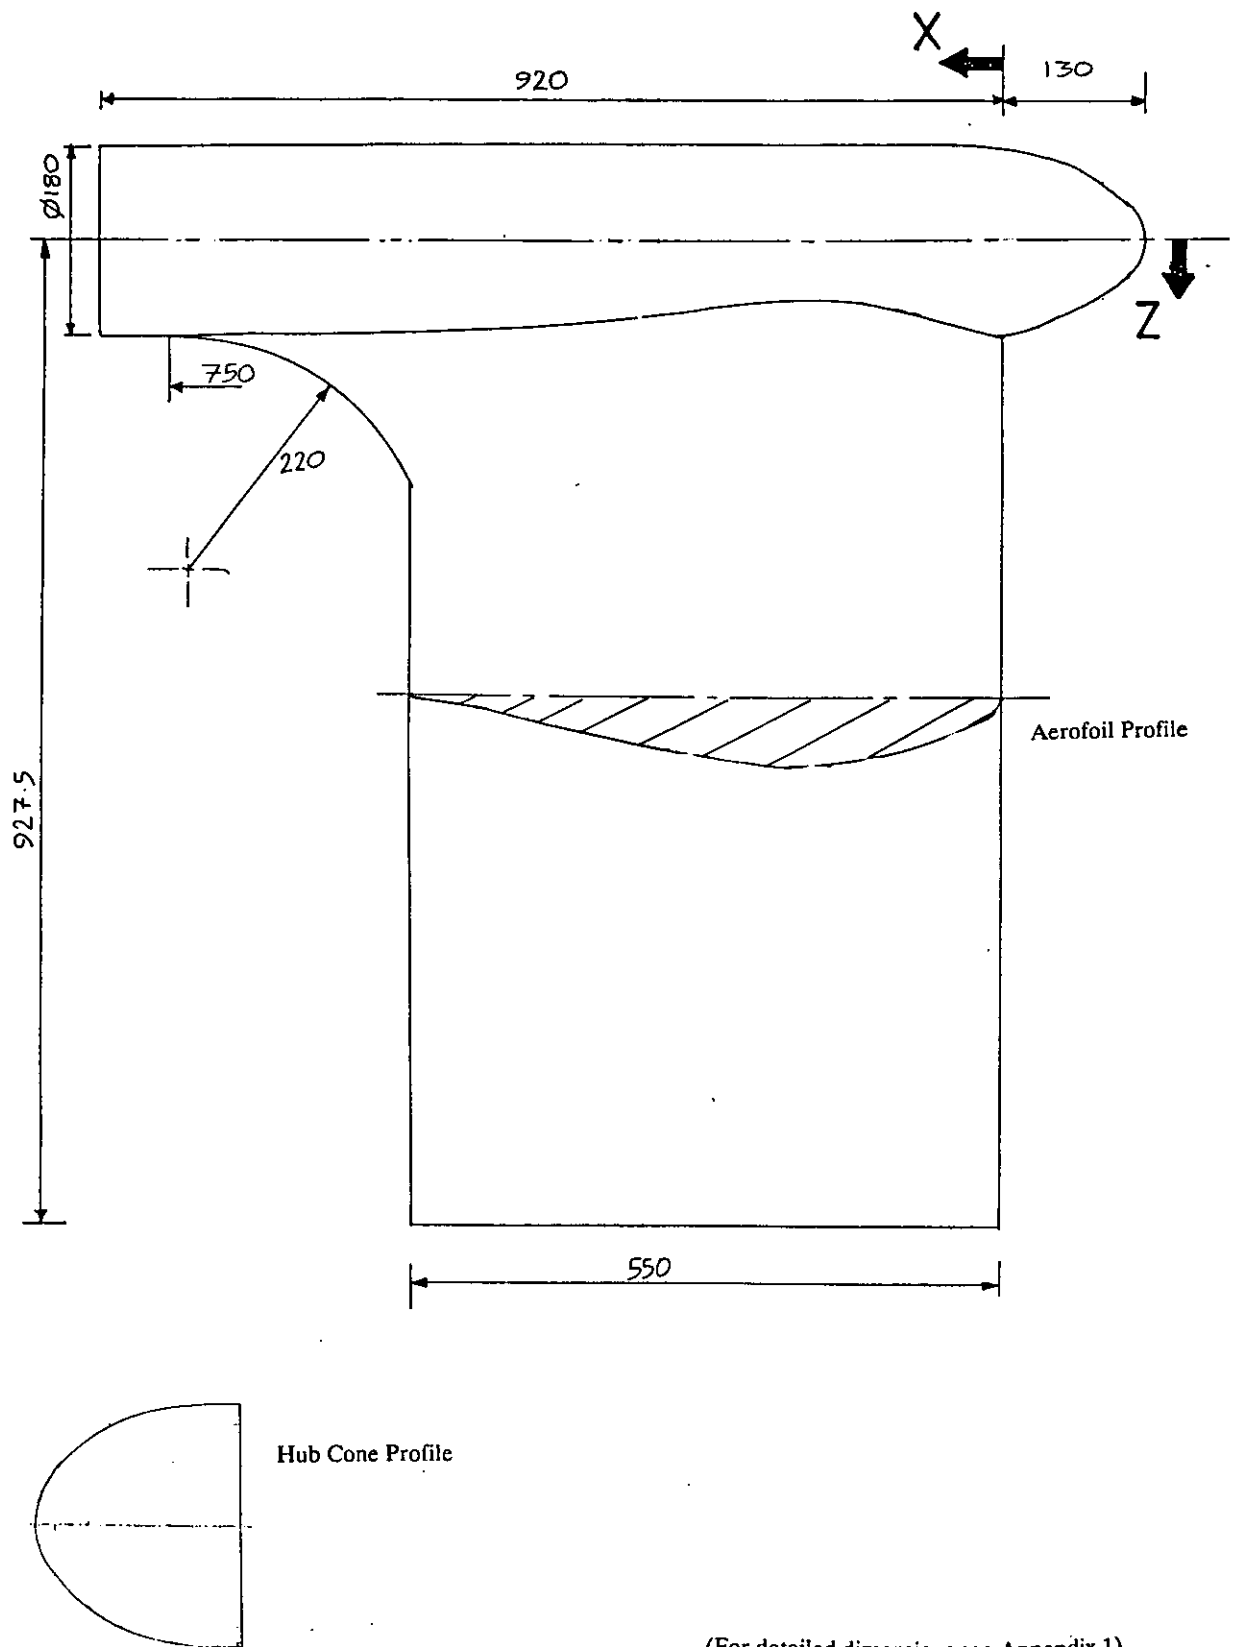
Fairing Around Above-Wind-Tunnel-Floor and Instrumentation Framework
